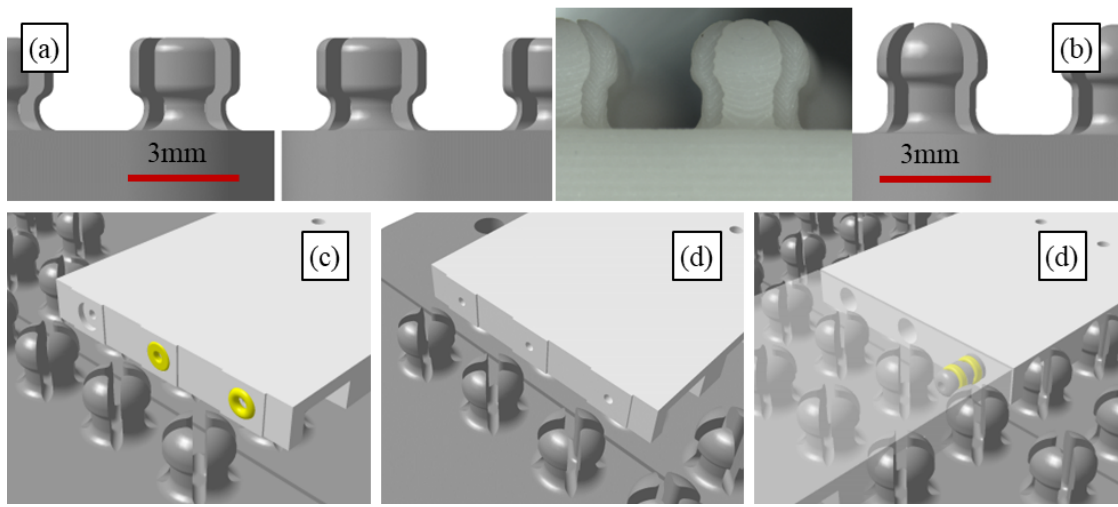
Design modifications for the ceramic samples. View of the pin (a) before and (b) after its modification. (c-d) Modification of the wall of the face seal solution and (e) samples with implemented radial seal design. In (b), the pin CAD design is overlapped with the 3D printed baseplate pin (ACCURA25[168]).
